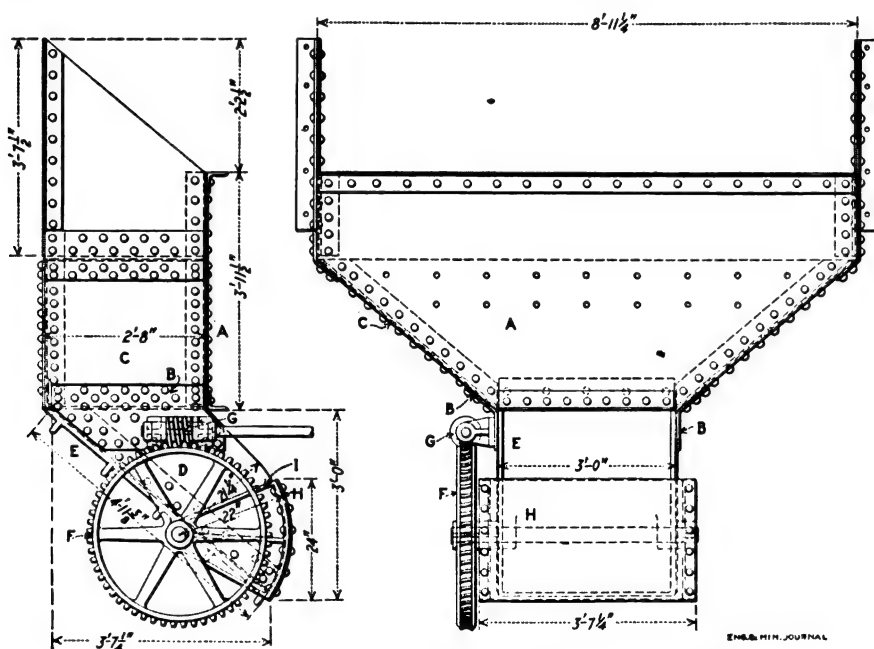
GEARED ROLLER FEEDER FOR COARSE ORE.
